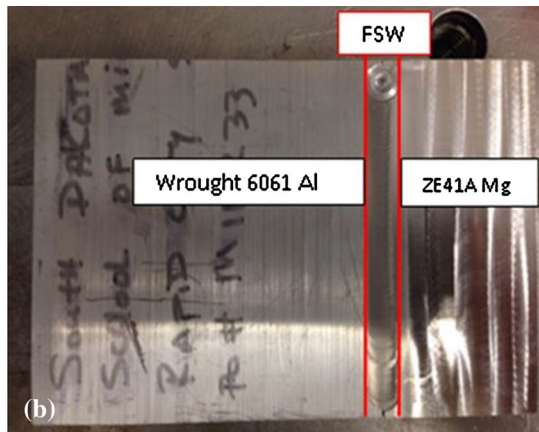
(a) Friction Stir Welding setup and in progress showing the rotating pin plunged into the CS T-layer and the wrought 6061-T6 Al joining it to ZE41A-T5 Mg (b) FSW sample of wrought 6061-T6 Al joined to ZE41A-T5 Mg
